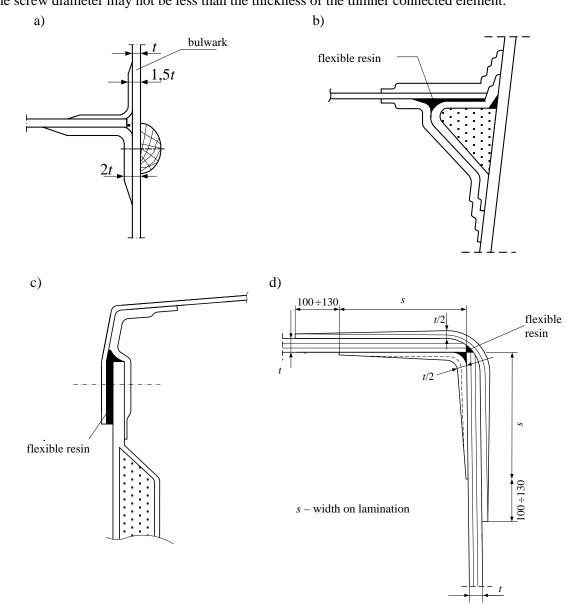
Recommended arrangements of deck-side joint
